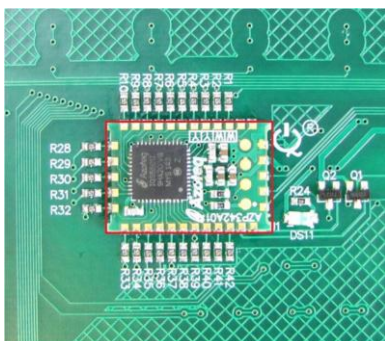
Bottom view of the IQS550 Wheel & Slider EV-Kit board
